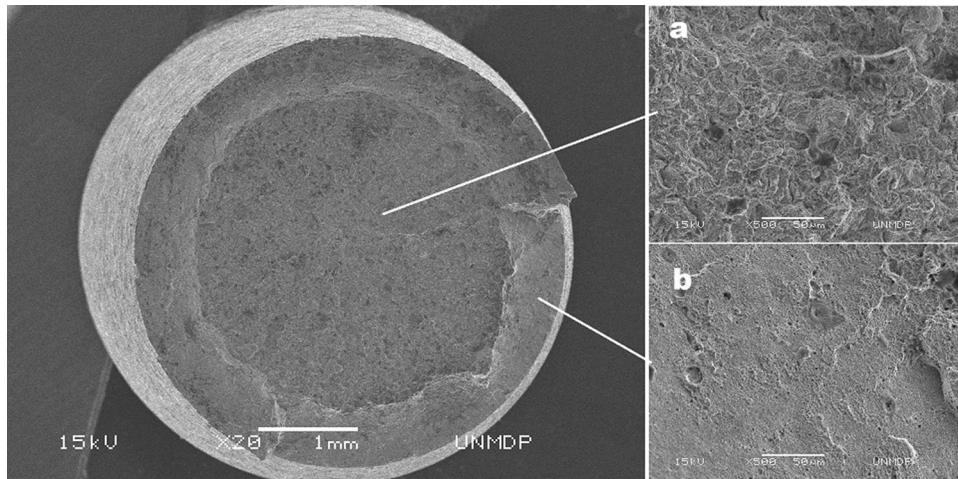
Fracture surface of steel sample tested in dry condition
